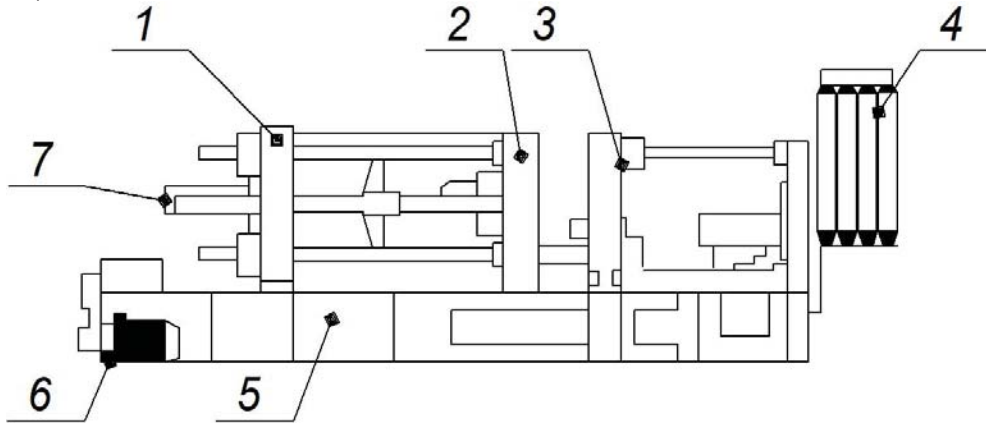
Injection molding device: 1 - plate; 2 - movable plate; 3 - fixed plate; 4 - hydroaccumulators; 5 - bed; 6 - hydraulic pumps; 7 - hydraulic cylinder.
